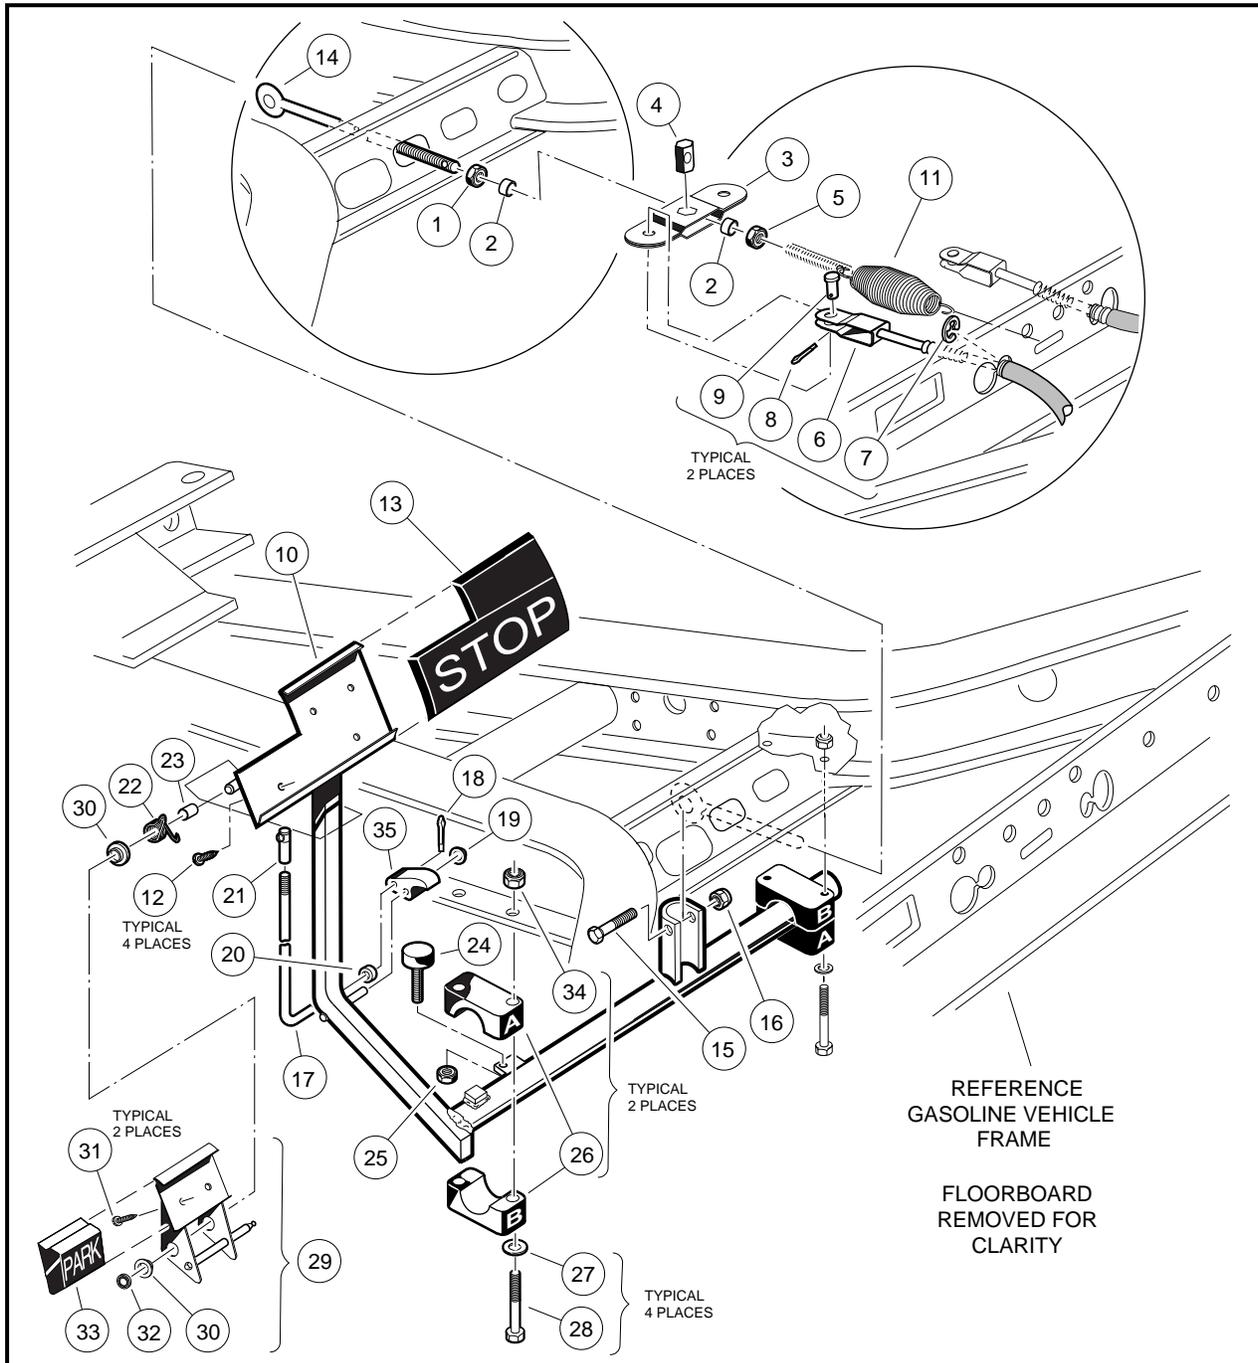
Brake and Park Brake Pedal Assembly and Mounting
